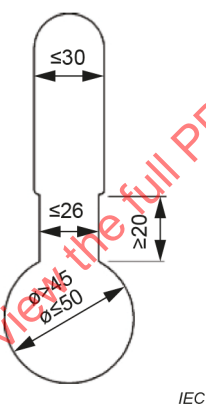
Example 3 – Opening sizes > 45 mm and ≤ 50 mm
